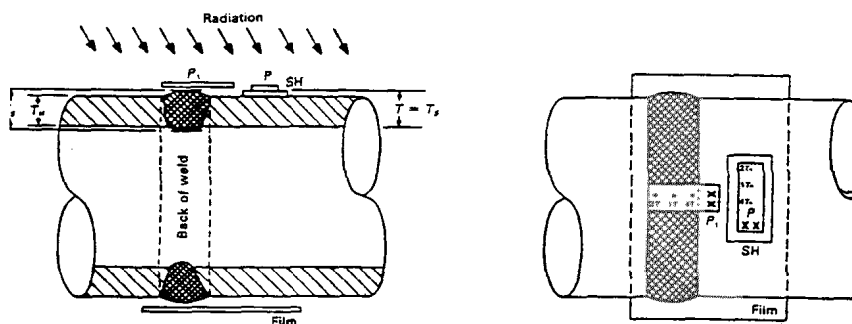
Double Wall Exposure/Double Wall Viewing
